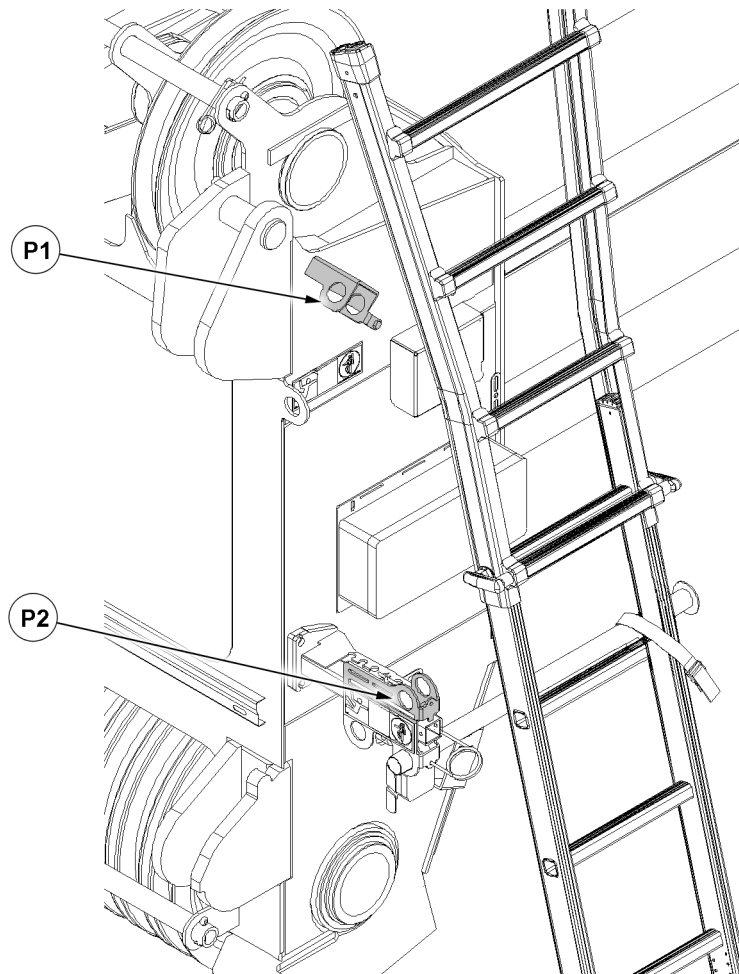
Assembling the wind speed sensor on the telescopic boom
